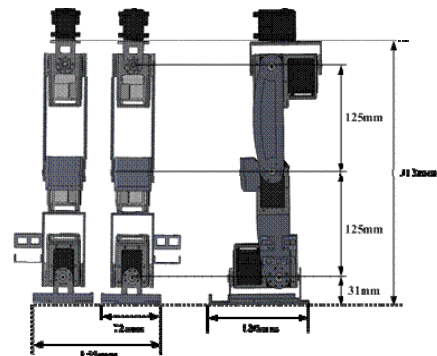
Arms mechanism dimension of HIWIN MAN.
